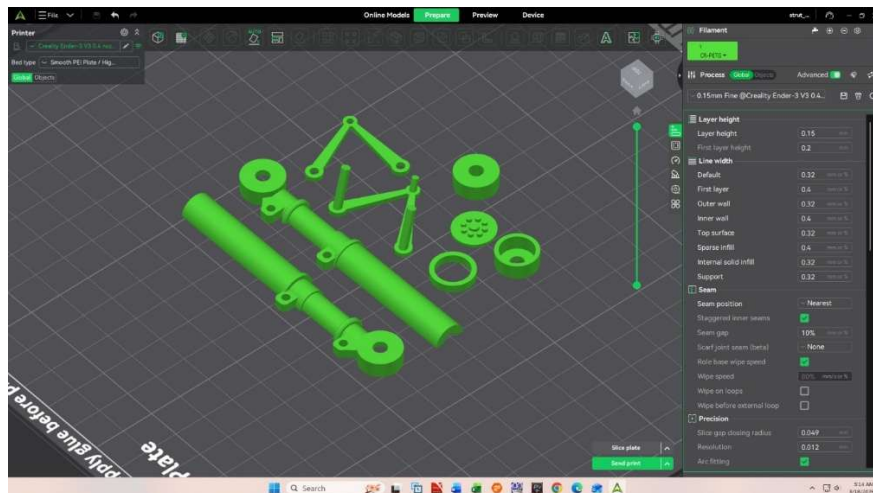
Wire Landing Gear Strut Cover 3D Printer Set-up
